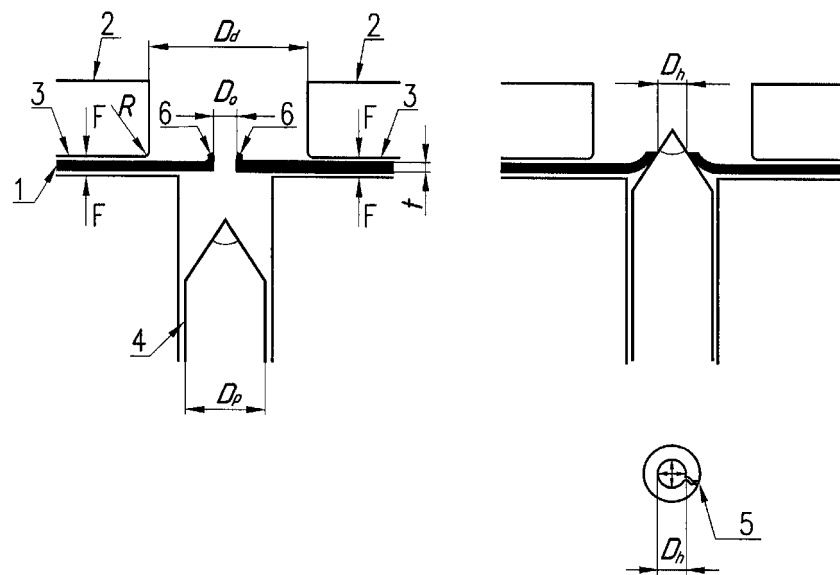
Illustration of hole expanding test [ISO479]: 1 - Test piece, 2 – Die, 3 - Die shoulder, 4 – Punch, 5 – Crack, 6 - Burr; D_d - Inside diameter of the die of expansion tool, D_h - Hole diameter after rupture, D_0 - Initial hole diameter, D_p - Diameter of the punch of expansion tool, F - Clamping force, R - Corner radius of the die of expansion tool, t - Thickness of the test piece.
